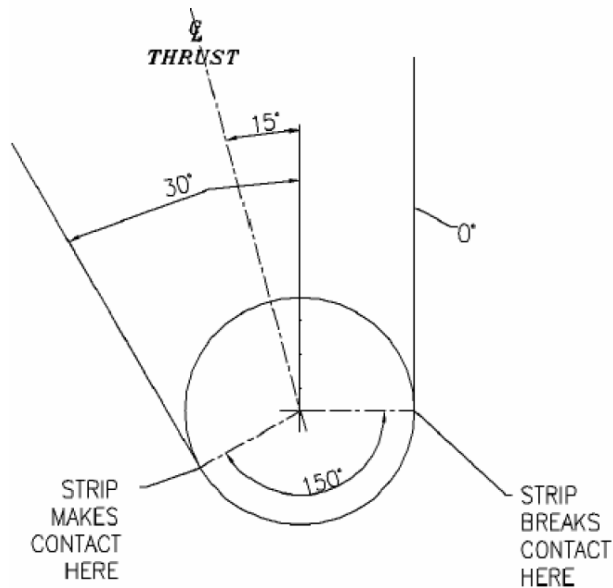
Steel Strip- Sink Roll Interface [28]
